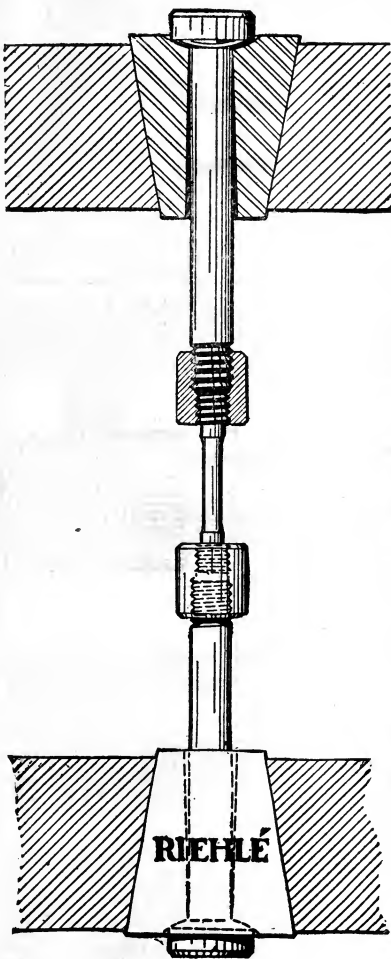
Riehle self-centering specimen holders. *They consist of* cast iron blocks which fit the heads of the machine, bolts with ball heads threaded on the ends, and the nuts in which the specimen is held. Taper holes are bored in the blocks to allow free motion of the bolts, and sockets are turned in the large end of the blocks in which the ball heads of the bolts rest. The nuts which hold the specimen are screwed on the bolts and the specimen is screwed in these nuts. Nuts for several sizes of specimens can be kept on hand and one set of nuts removed from the bolts and another set put on them. Nuts that hold the specimen are arranged for the specimen adopted by the American Section of International Association for Testing Materials as the Standard American Specimen. This specimen is  $\frac{1}{2}$  in. (12.7 mm.) diameter with  $\frac{3}{4}$  in. (19.05 mm.) U. S. Standard Threaded Ends.
